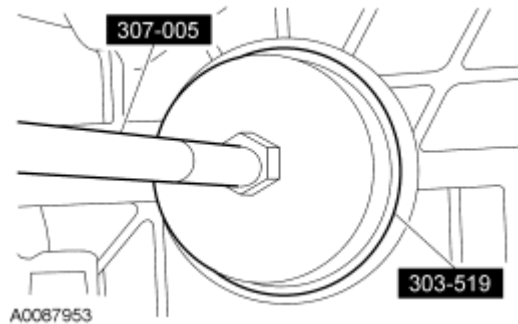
Identifying Special Tools (307-005 And 303-519)
